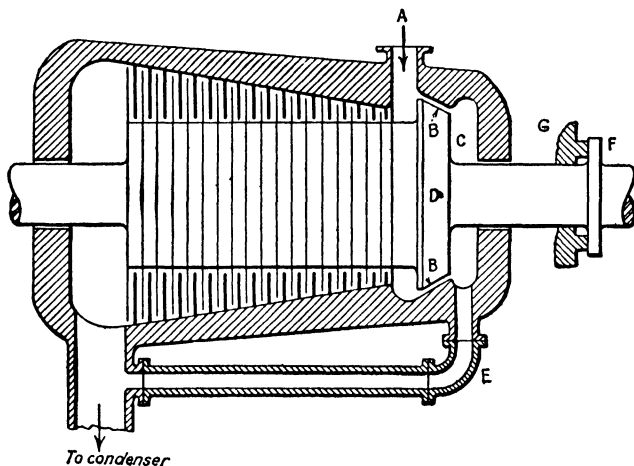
Steam turbine showing dummy piston D , labyrinth B , thrust bearing F , G , and equilibrium pipe E .
